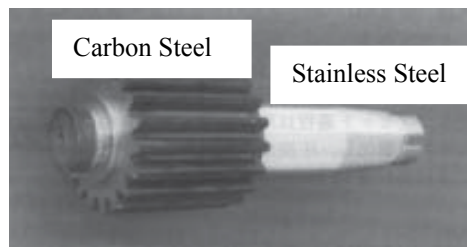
Friction welding example: gear pump shaft [28]
